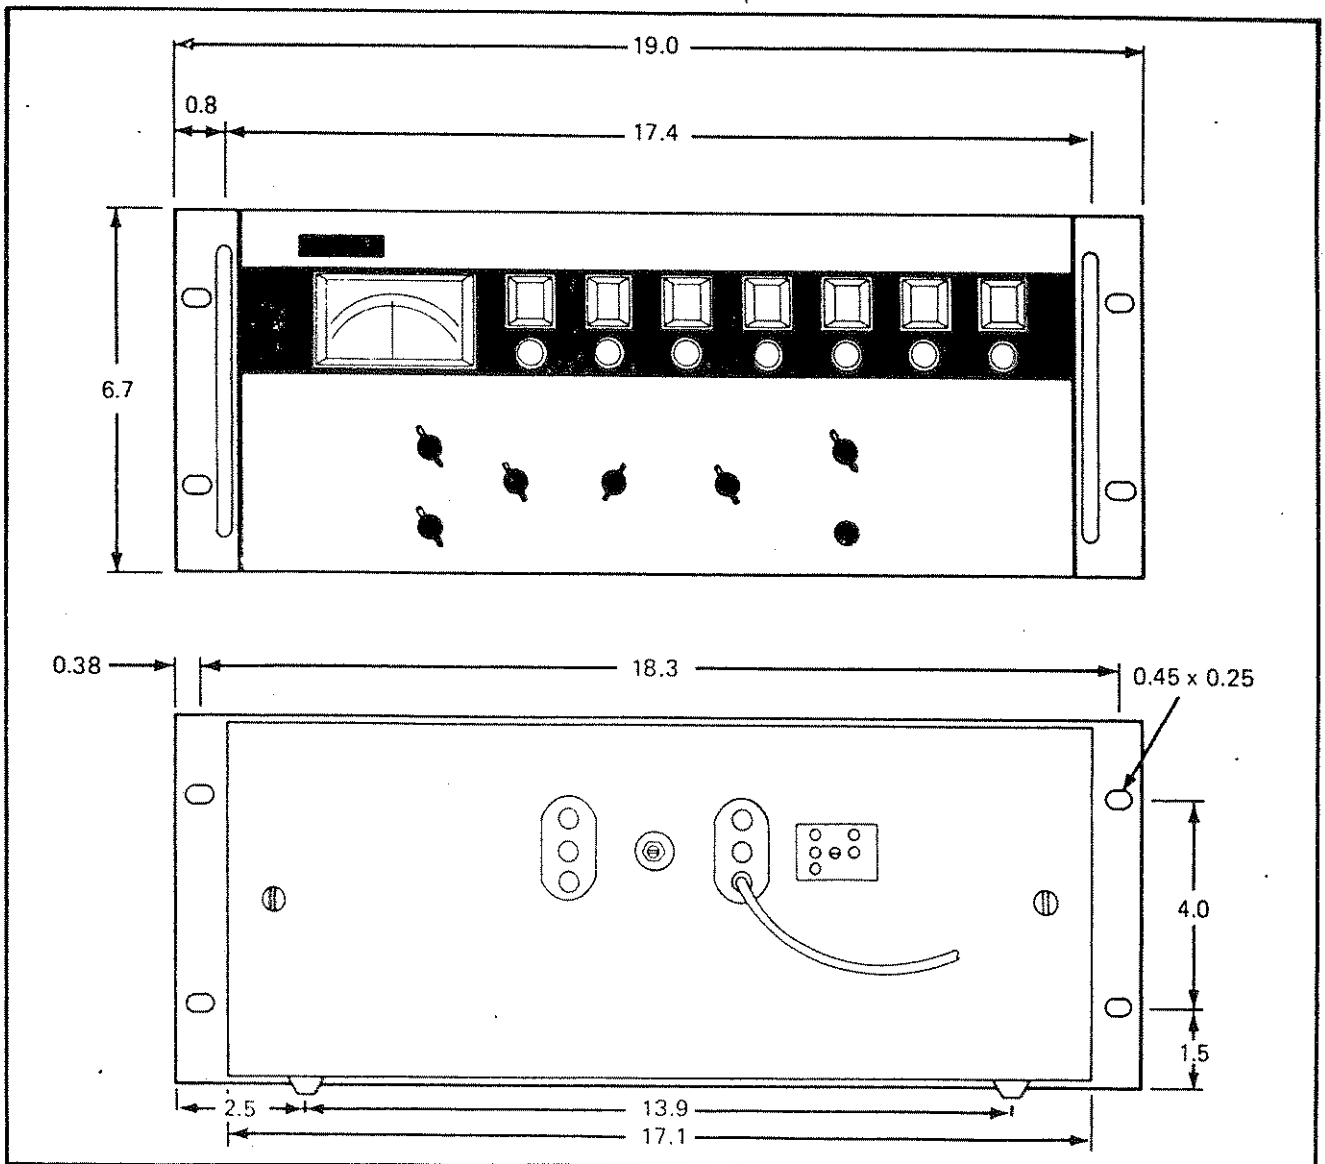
OUTLINE DRAWING(Sheet 1 of 2)
